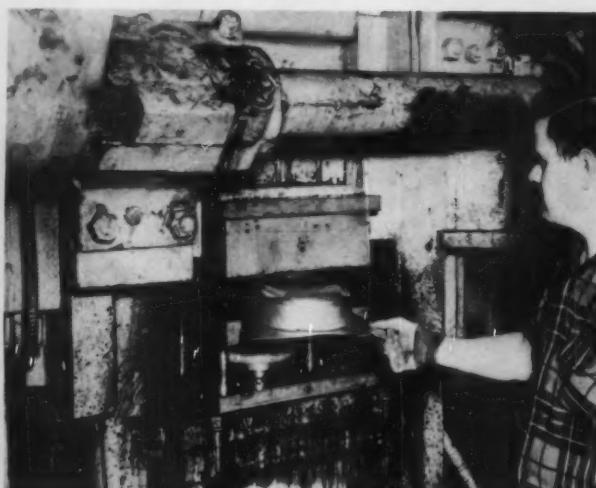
Cast epoxy draw die for making half of an outboard motor housing was delivered to manufacturer only three weeks after receipt of drawings
